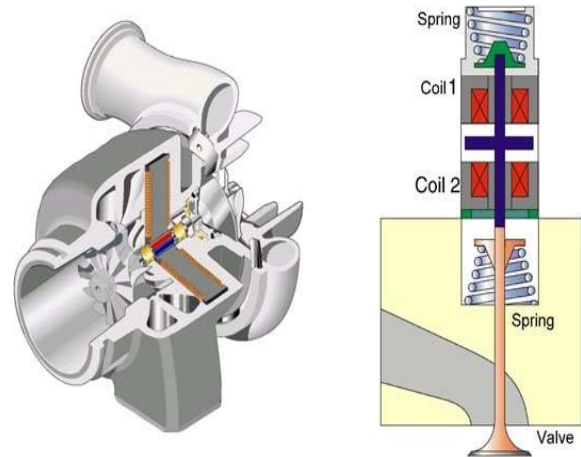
Mechatronics in engine systems: electrically supported turbo charger and electromagnetic engine valve.
